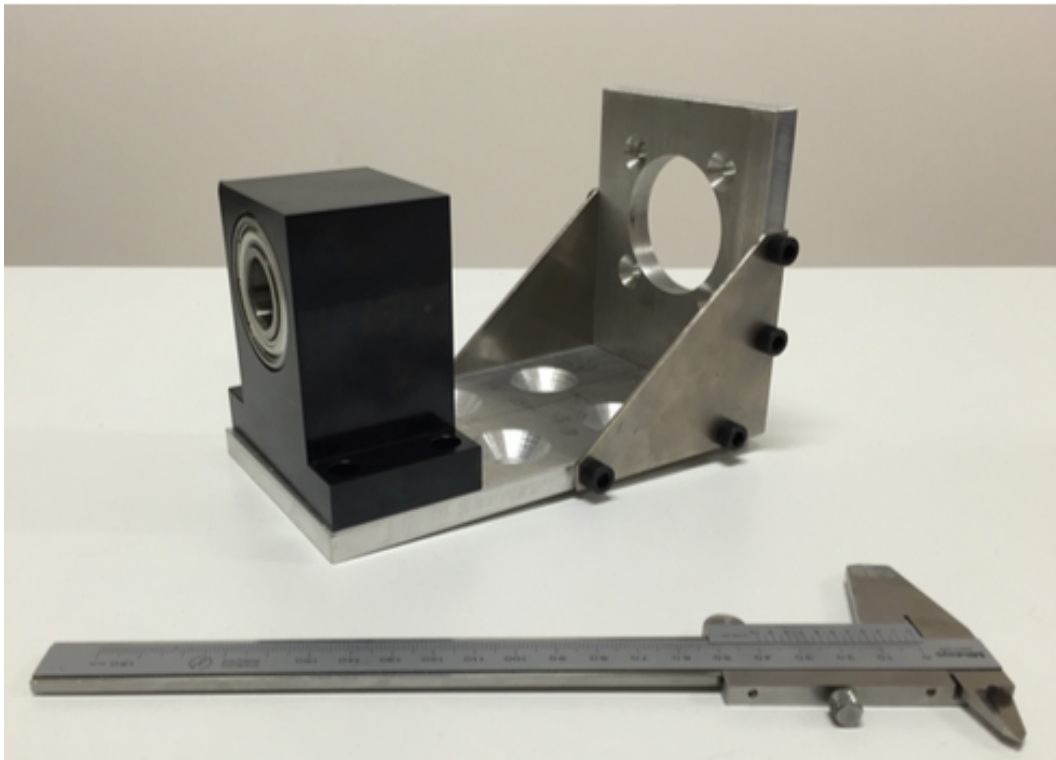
Joint 2* assembly, no motor installed. The black component is the dual bearings shaft holder.
